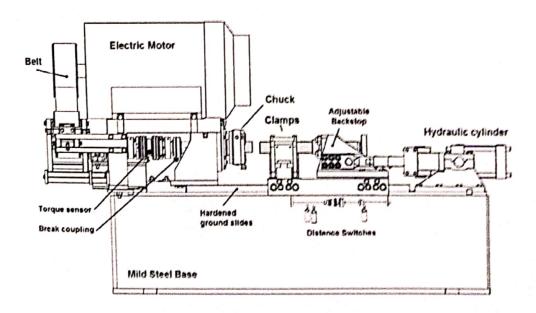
Overview of the basic components of the friction welding machine
